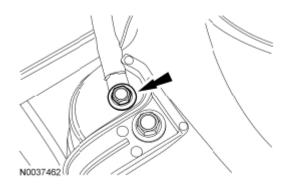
Locating Ground Wire And Bolt Courtesy of FORD MOTOR CO.
